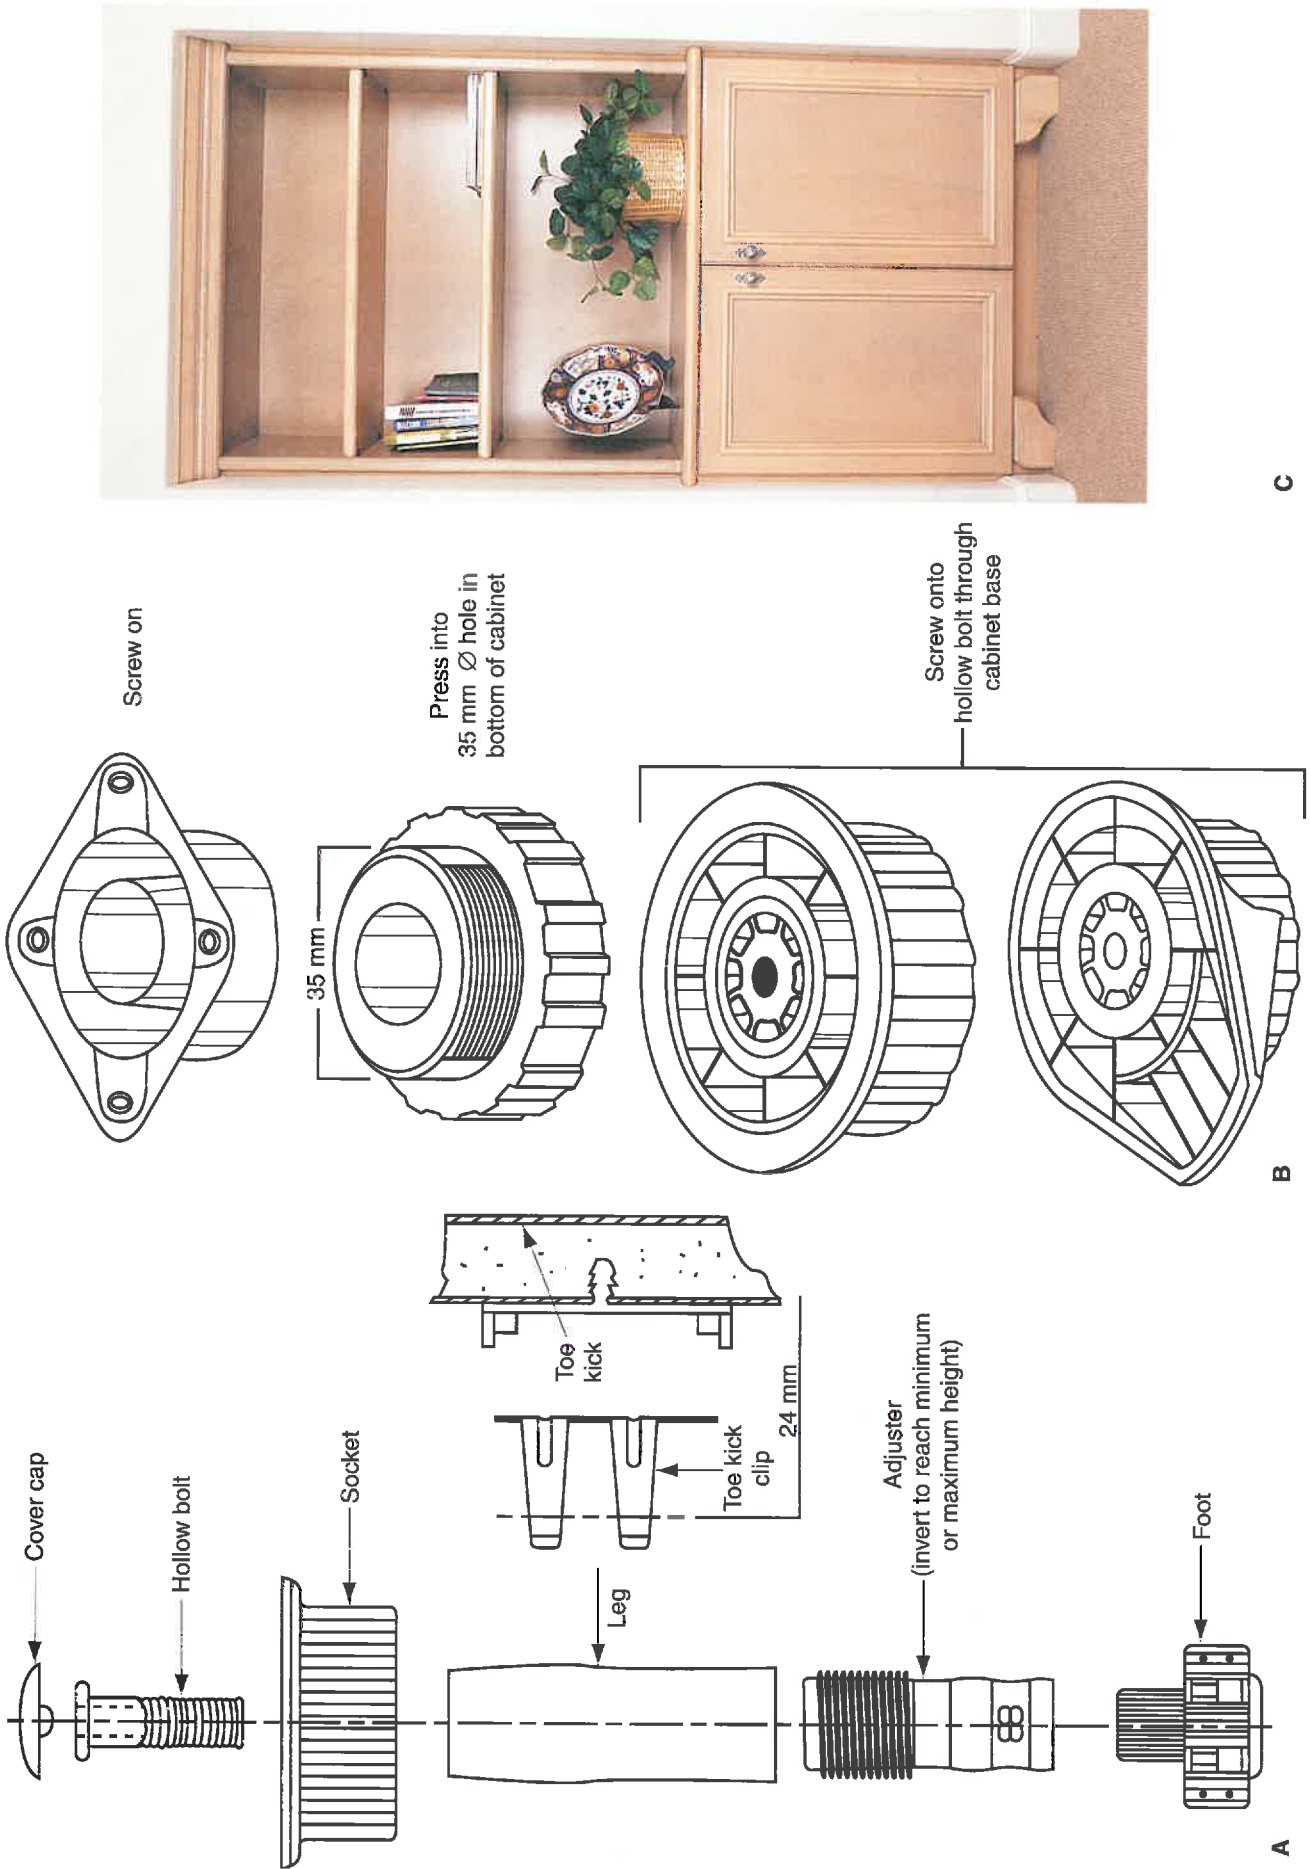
Cabinet levelers. A—Essential components of a Camar® cabinet leveler. (*Peter Meier, Inc.*) B—A variety of sockets. The wide flange socket can support two adjoining cabinets. (*Peter Meier, Inc.*) C—The toe kick and faux legs clip onto the levelers under this cabinet. (*Chuck Davis Cabinets*)
